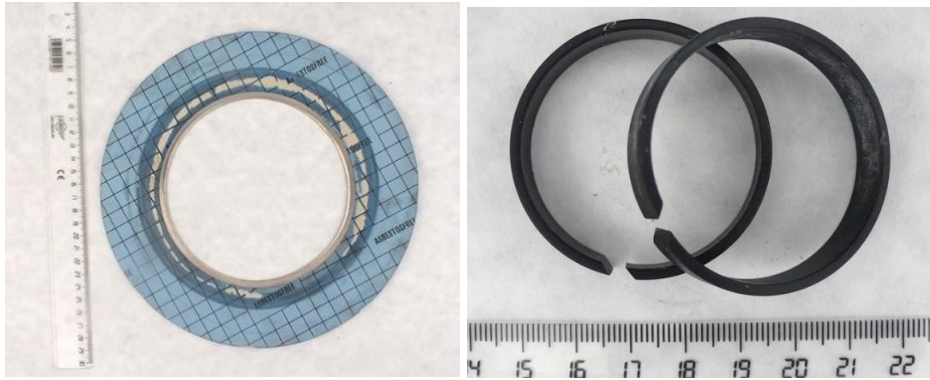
Parts of the regulator: gasket (left) and guide rings (right)
